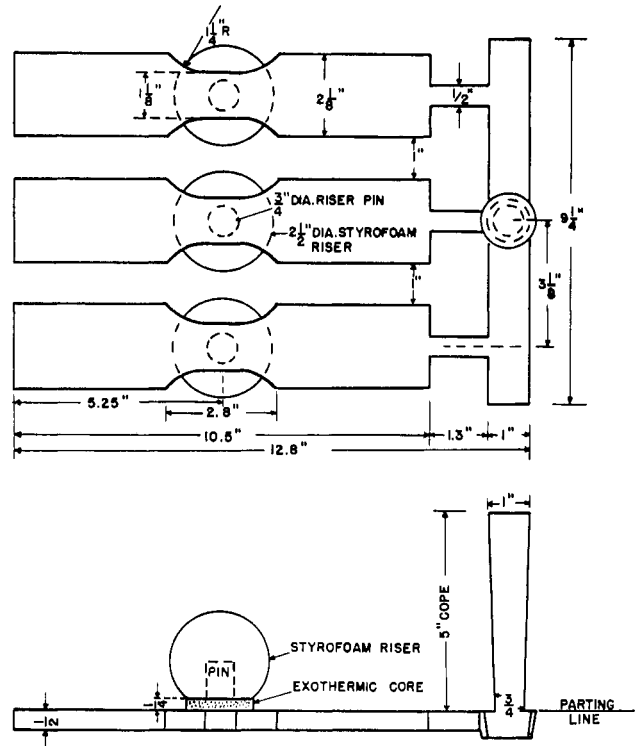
Gating and risering arrangement for plate bending fatigue specimens sections.
